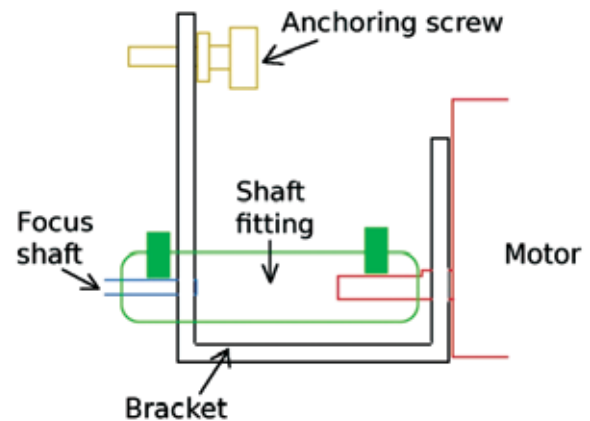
Schematic of coupler that connects the 6-mm motor shaft to the 4-mm focuser shaft.
